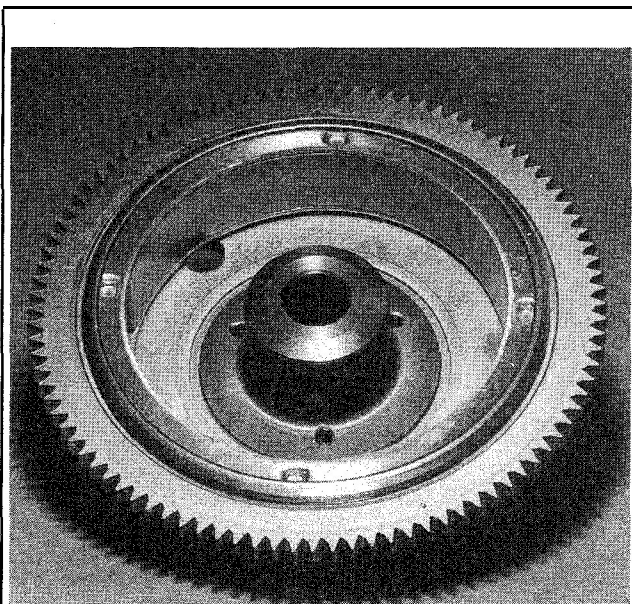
Always check the flywheel carefully to be sure particles of metal have not stuck to the magnets
